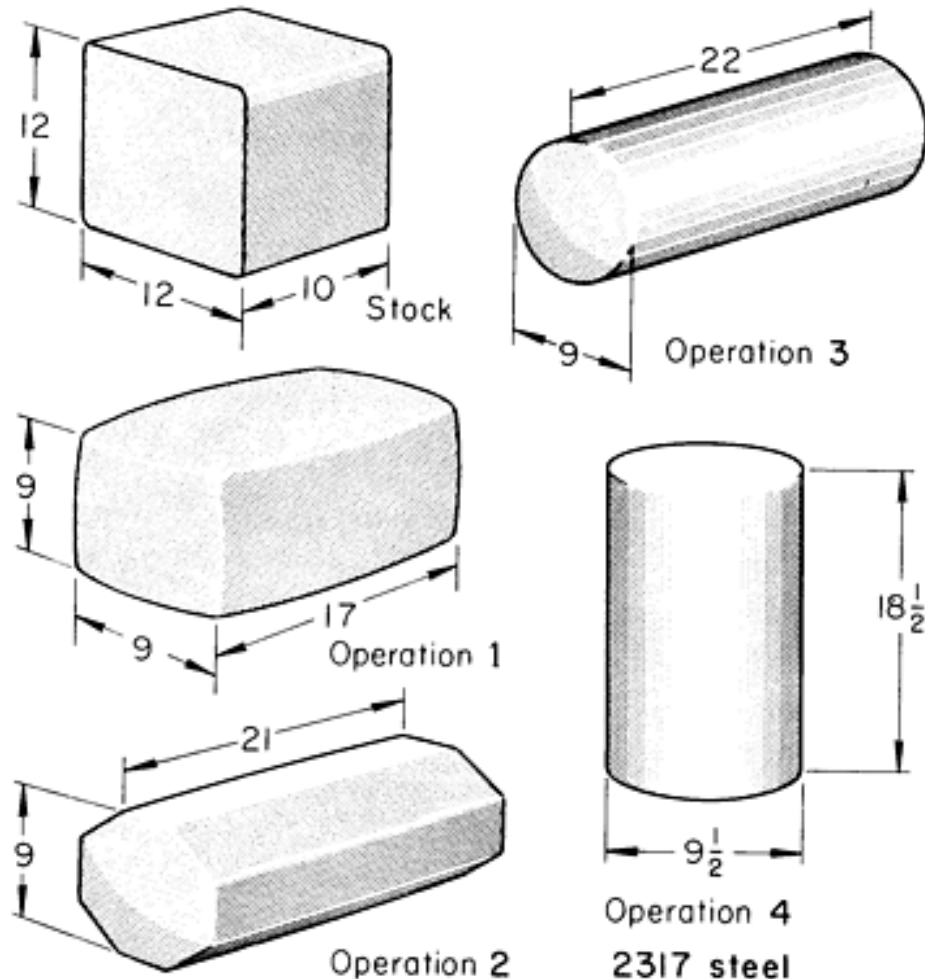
Sequence of operations in the forging of a cylindrical workpiece from square stock. Dimensions in figure given in inches
